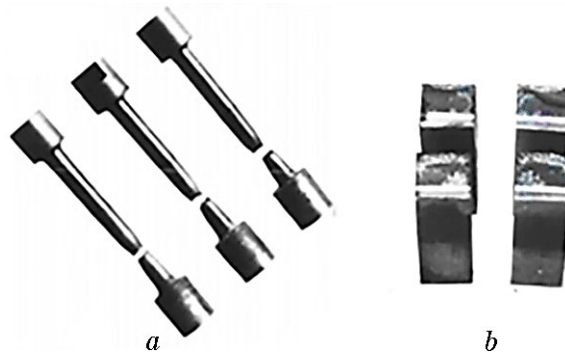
The nature of the fracture of the sample during tensile tests (*a*) and the impact toughness of the KCU joint (*b*) according to GOST 6996-80 of R6M5 steel with steel 45 of the welded joint obtained by pressure welding through hydrocarbon interlayers.
